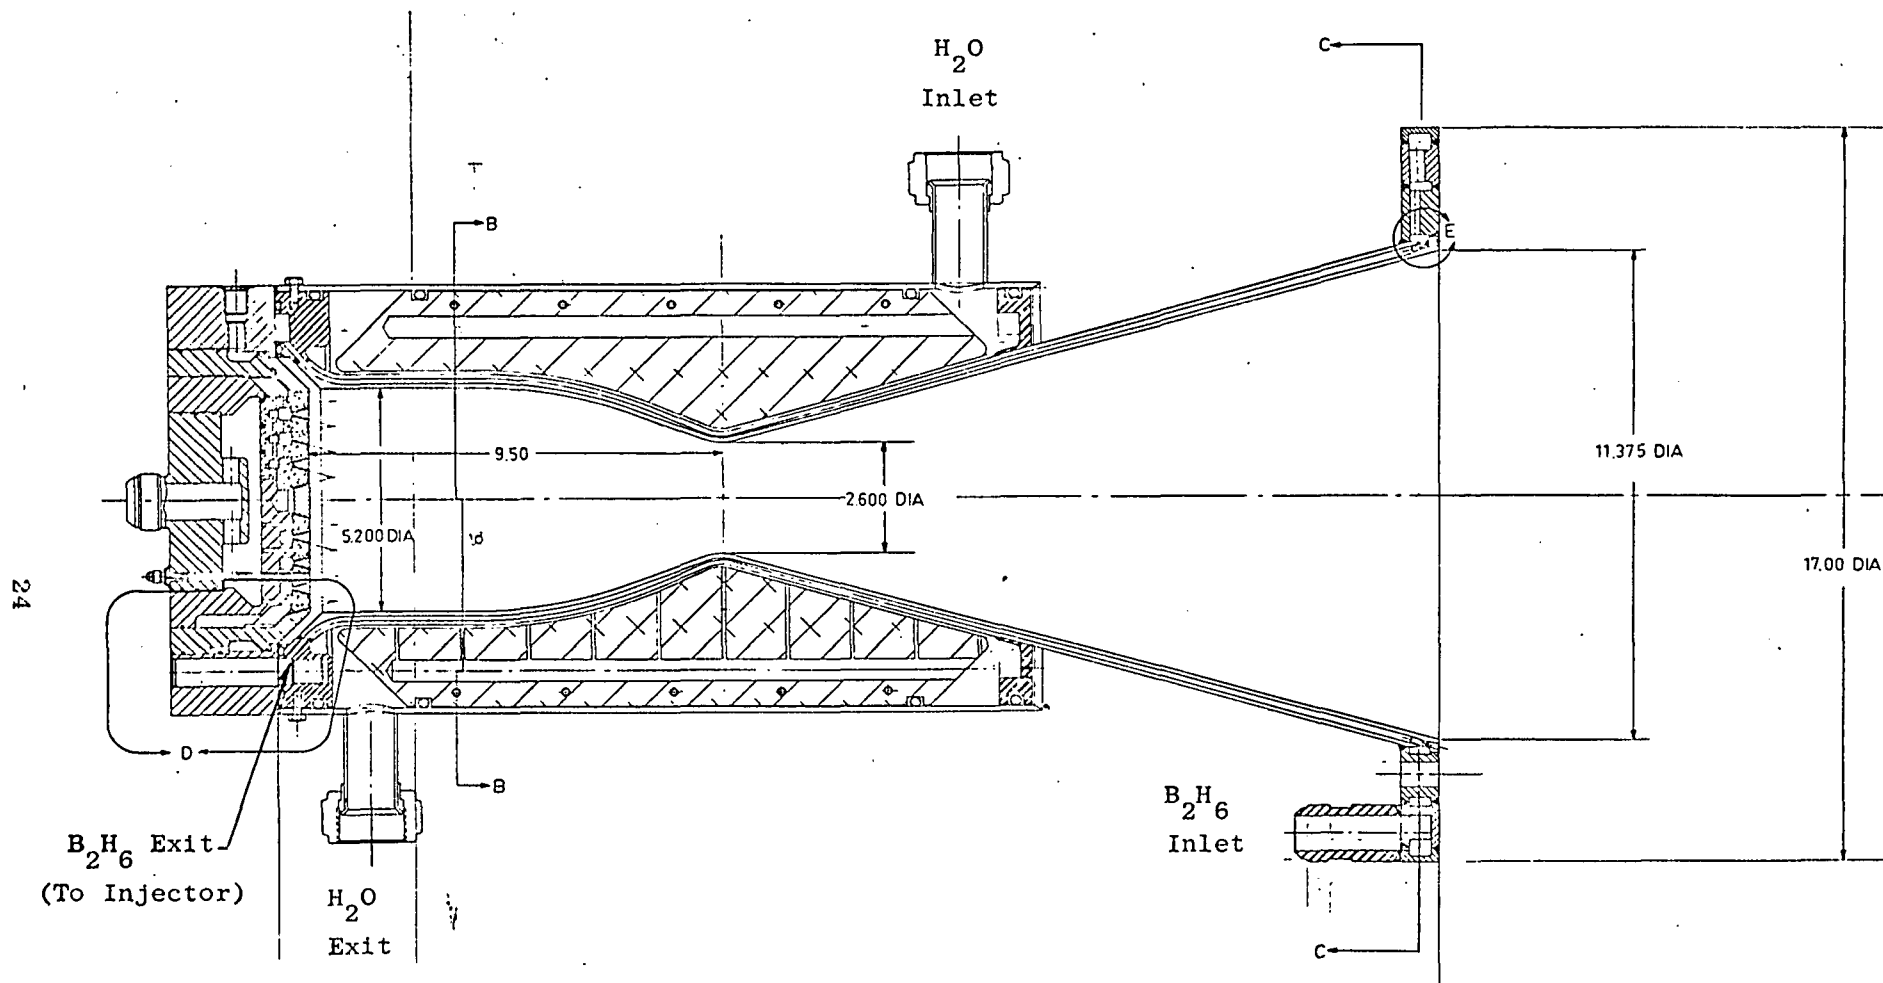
Demonstrator Thrust Chamber Assembly (H₂O/B₂H₆ Cooled)
